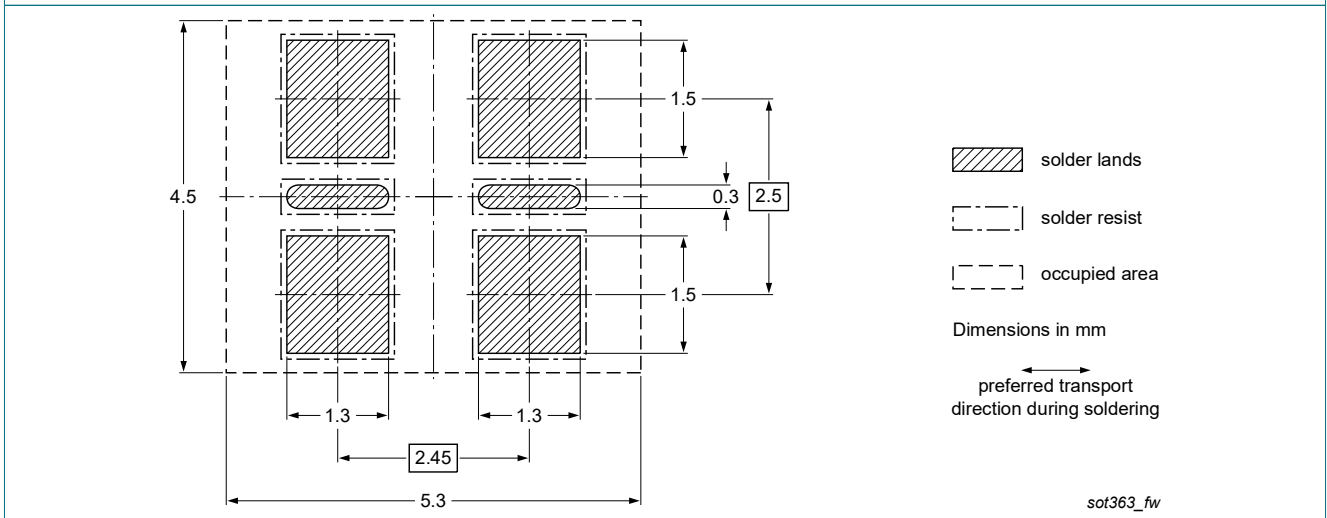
Wave soldering footprint for TSSOP6 (SOT363)
